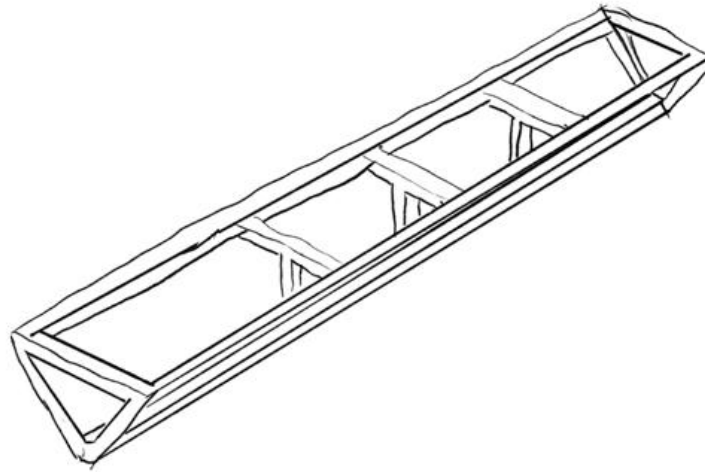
Sketch of frame Concept 1: Triangular T-frame (Source: Author).
